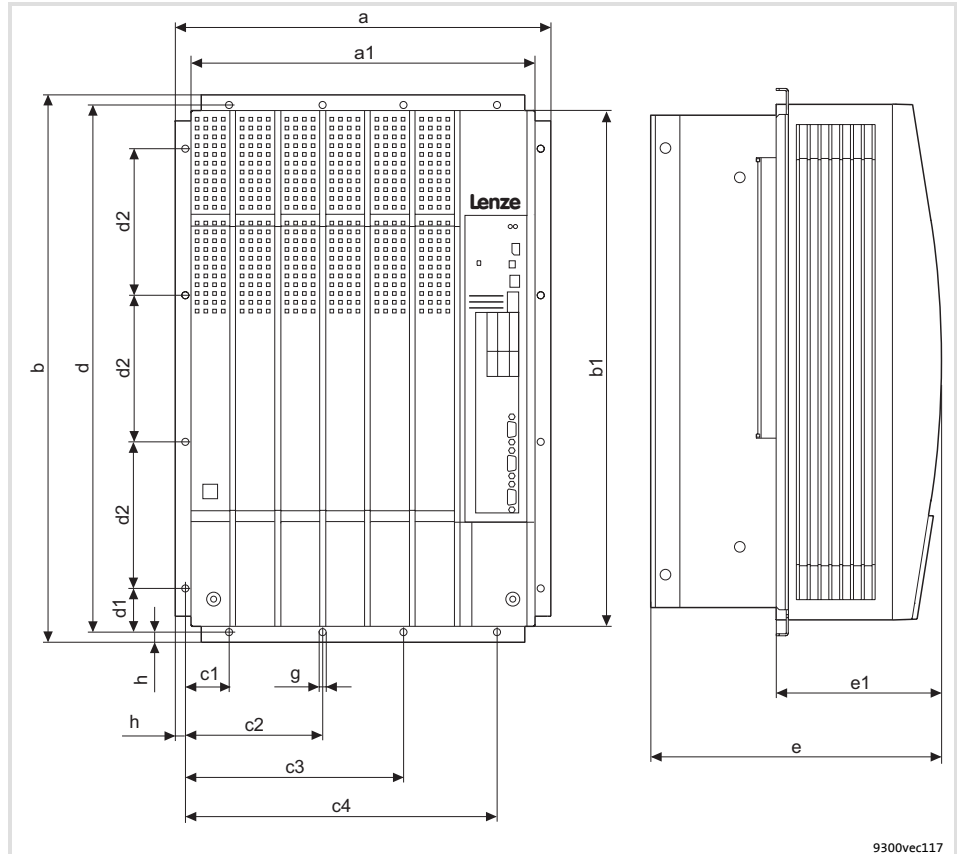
Dimensions for thermally separated mounting 45 ... 55 kW
